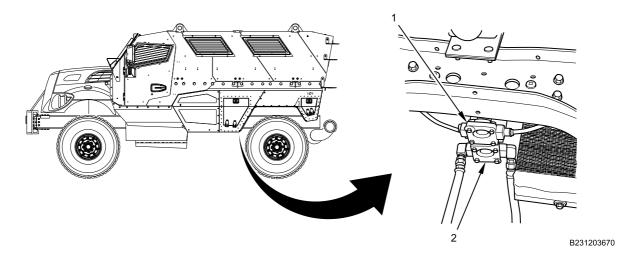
Right Front Service Line and Rear Brake Chamber Quick-Release Valves.
